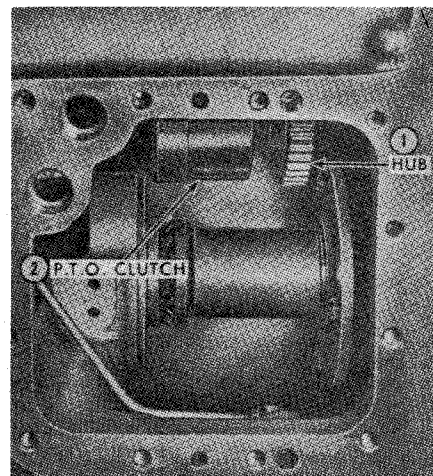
View with hydraulic system pump removed showing pto clutch and drive hub. Clutch and hub can be removed out pump adapter plate opening after removing clutch output shaft reduction drive gears.
